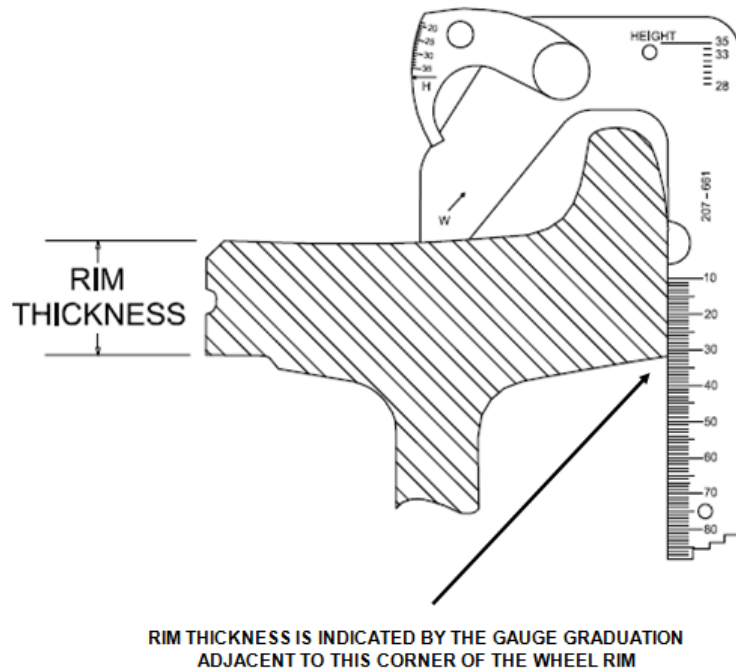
Gauge No. 207-661 rim thickness measurement
